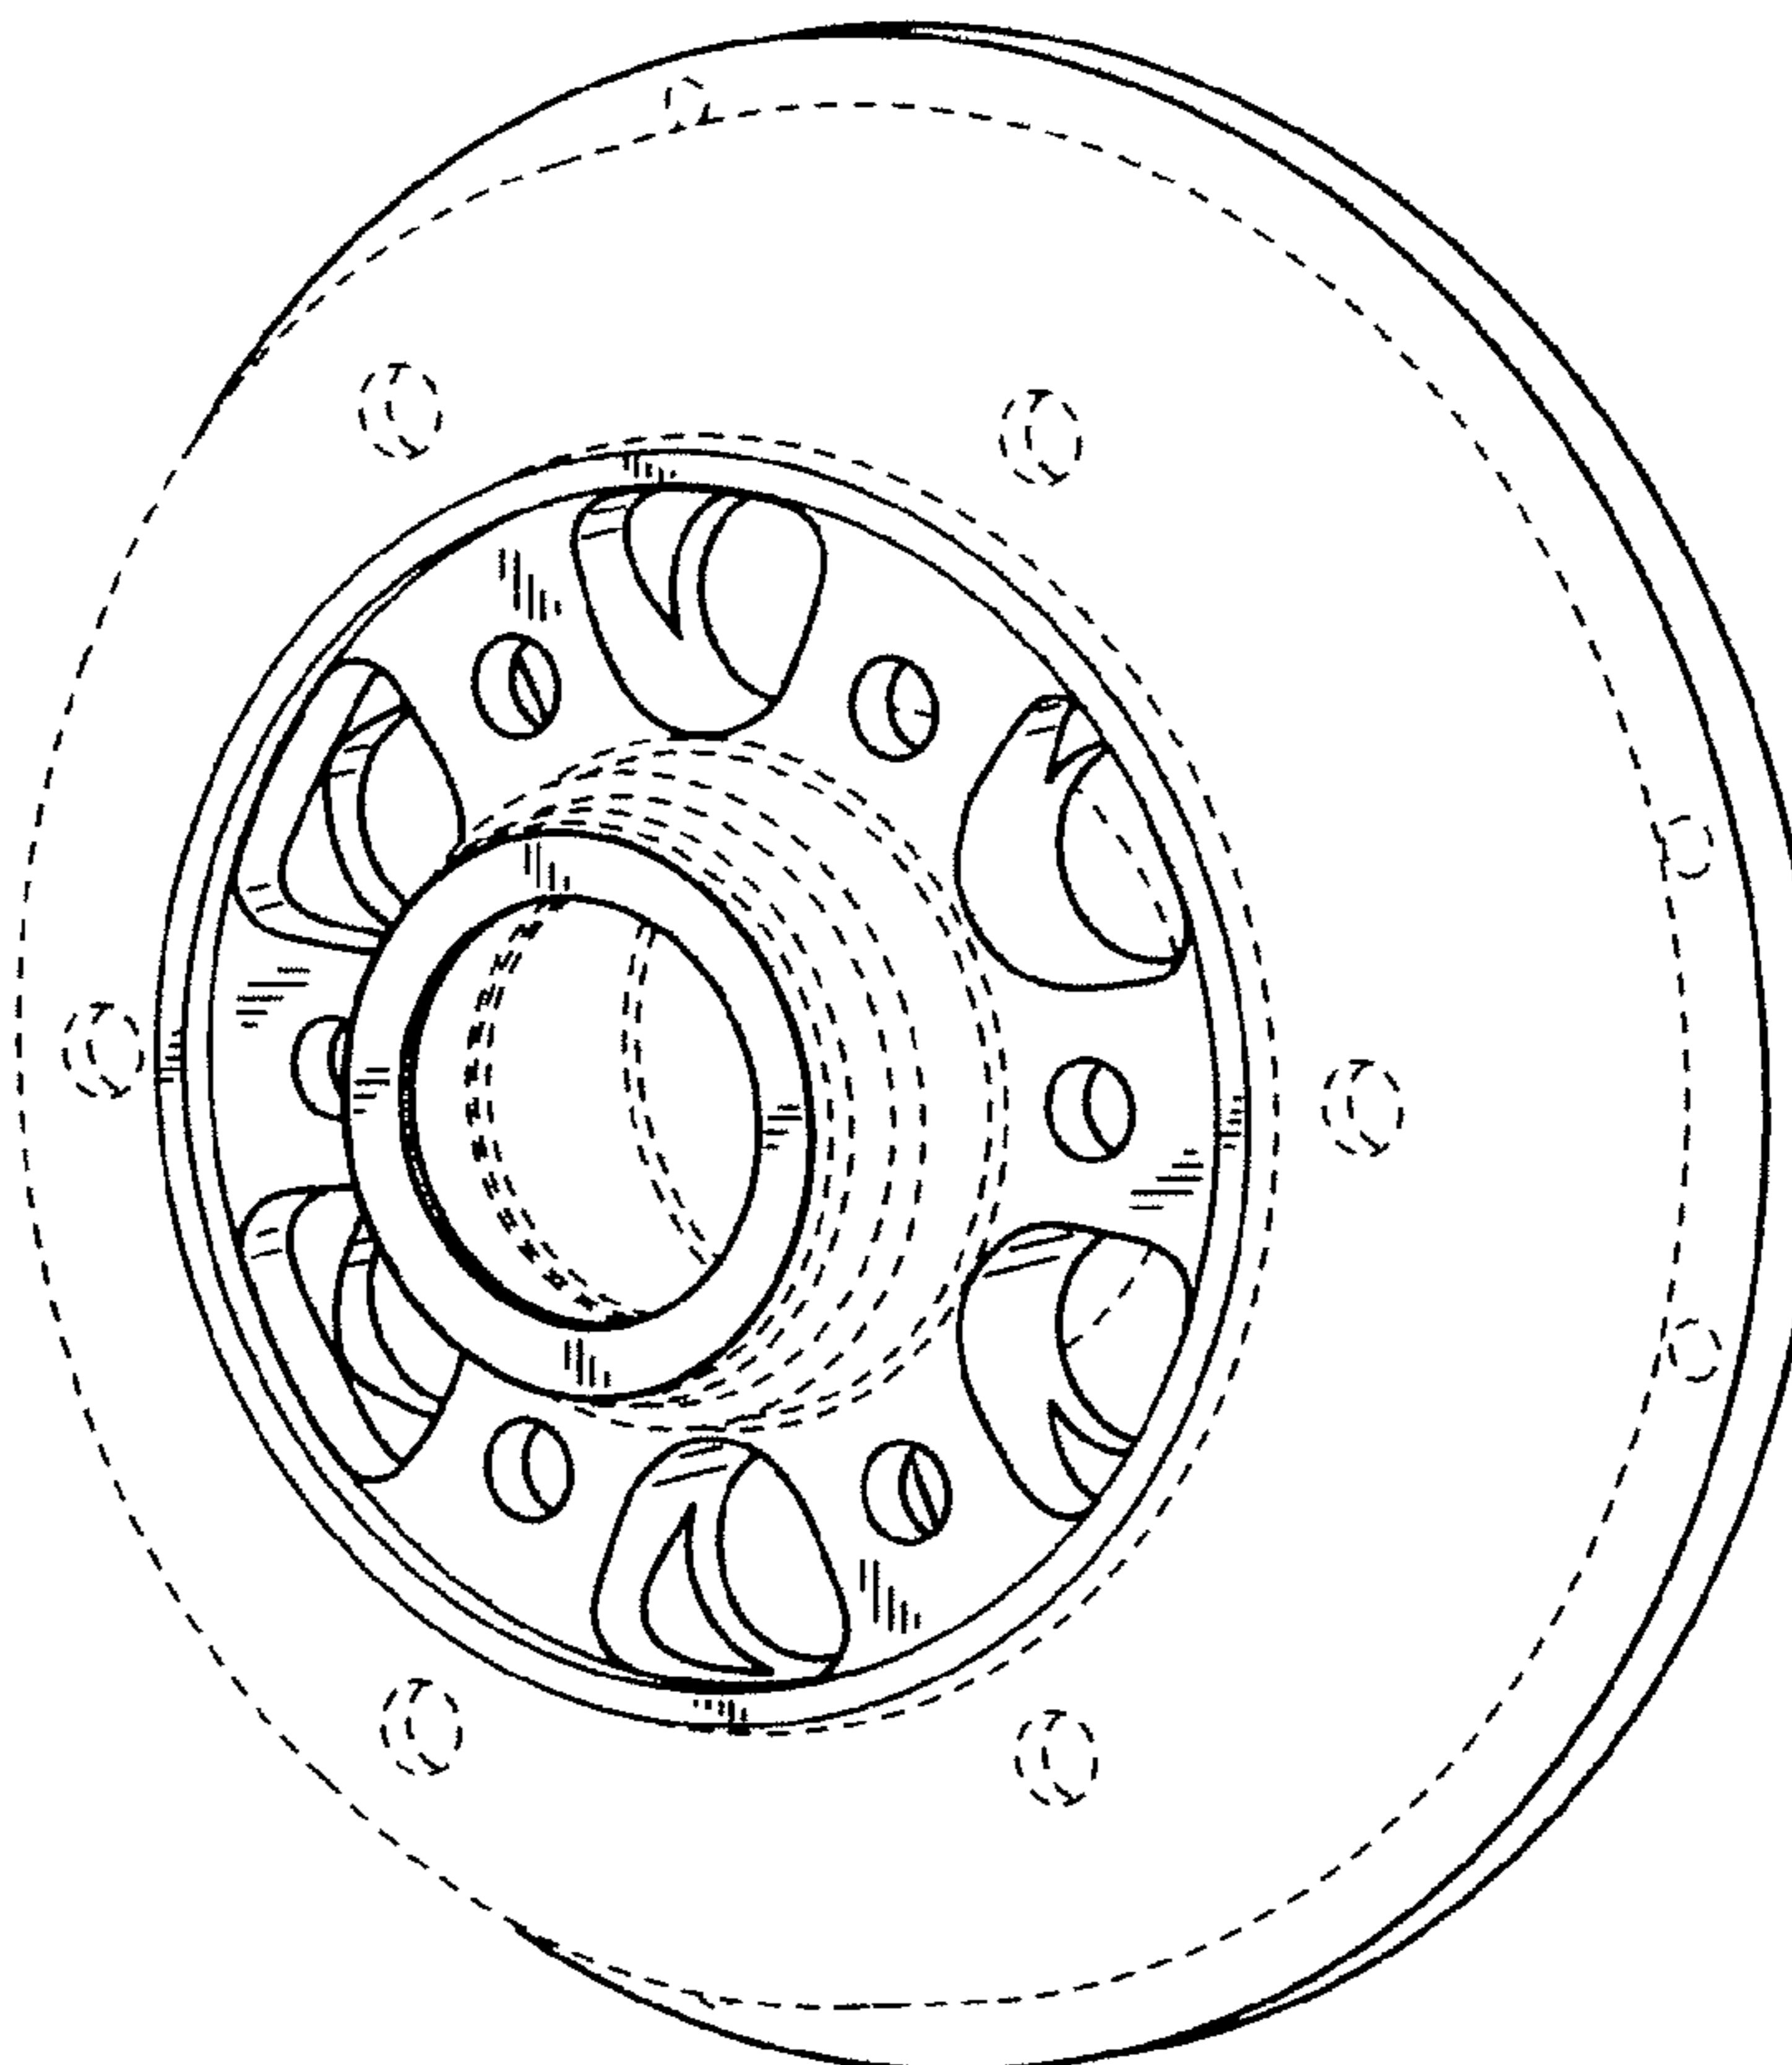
is a rear view of the clutch mechanism with annular ridge;
